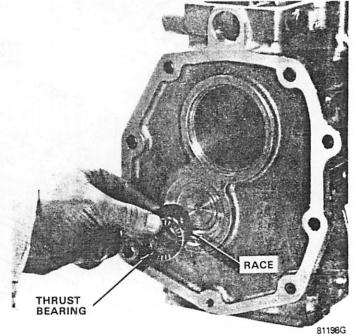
B-8 Countershaft Rear Thrust Bearing and Race Removal/Installation
